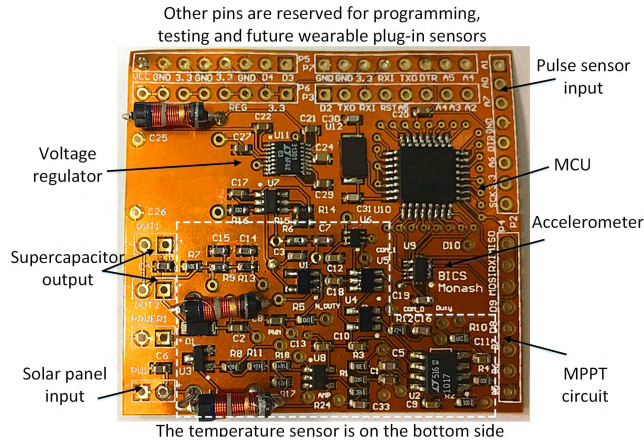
Flexible PCB design for the wearable sensor node circuit with MPPT (5.0*4.8 cm²).
